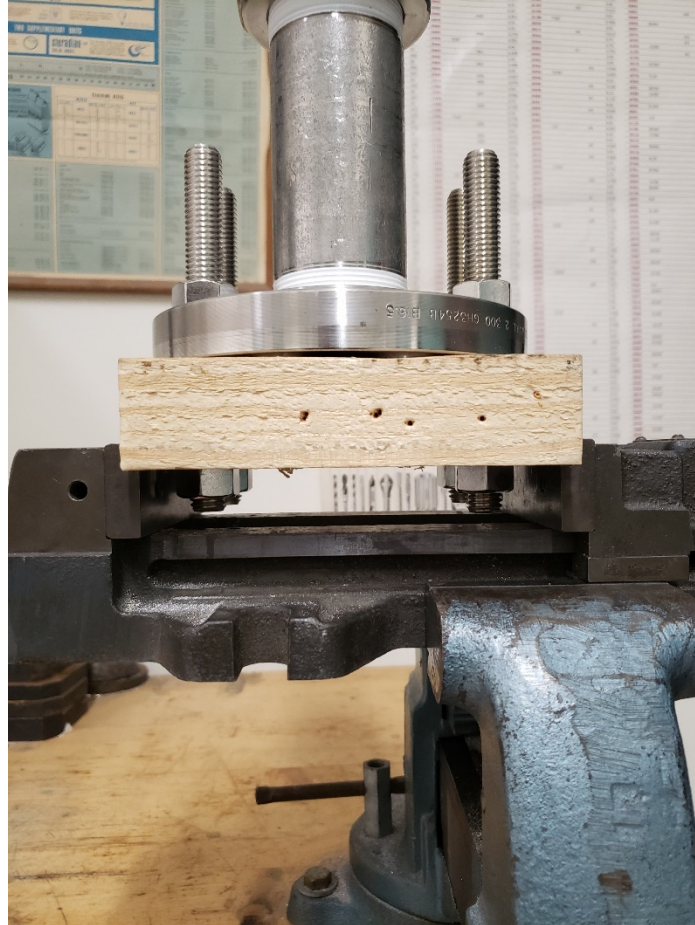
Flange block side view for 2-inch NPT threaded fitting tightening procedure
